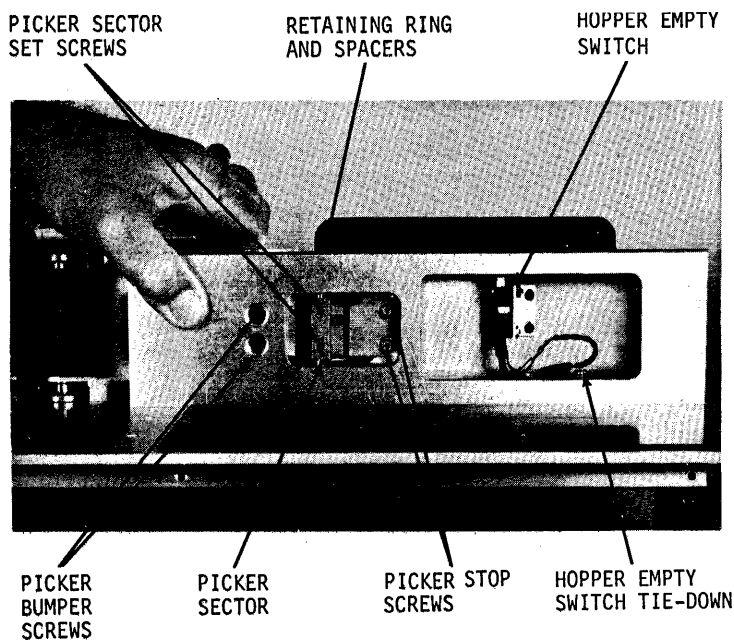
Replacement of Picker Casting And Picker Sector, Front View
